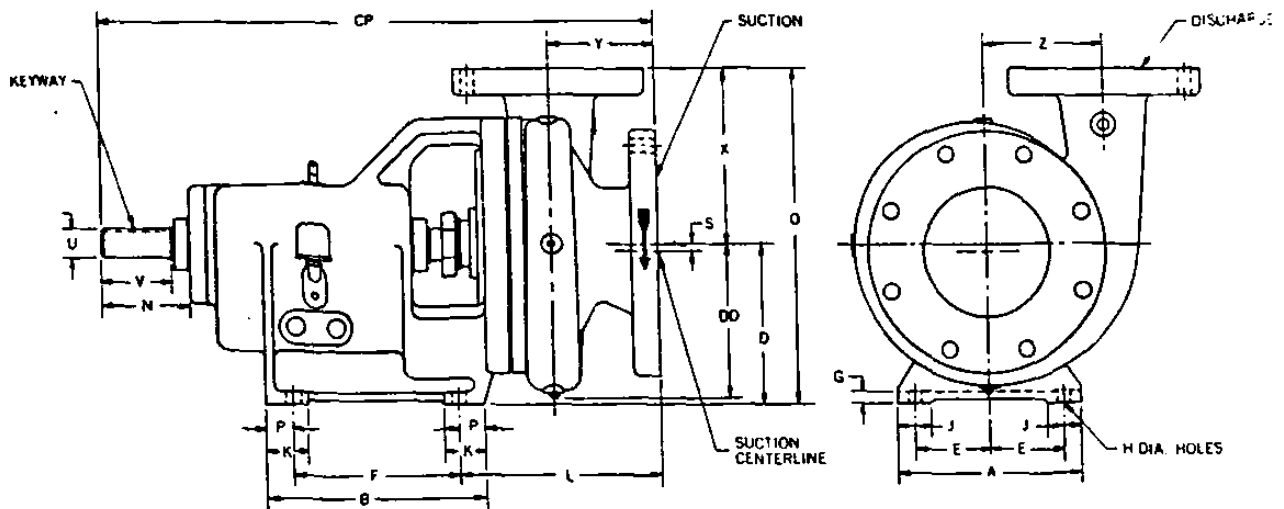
OVERHUNG IMPELLER, SEPARATELY COUPLED, SINGLE STAGE, FRAME MOUNTED
